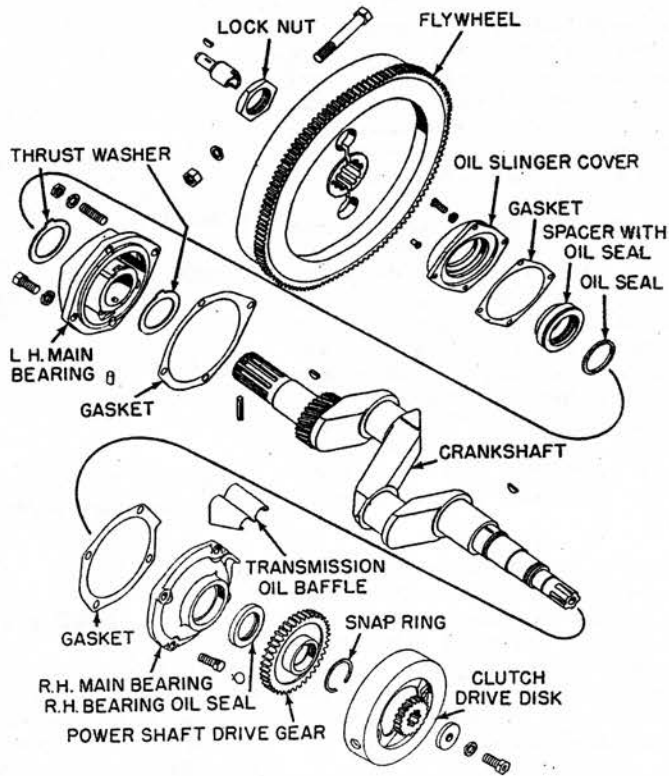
A Exploded view of Model 60 crankshaft and related parts. Model 50 is similar
